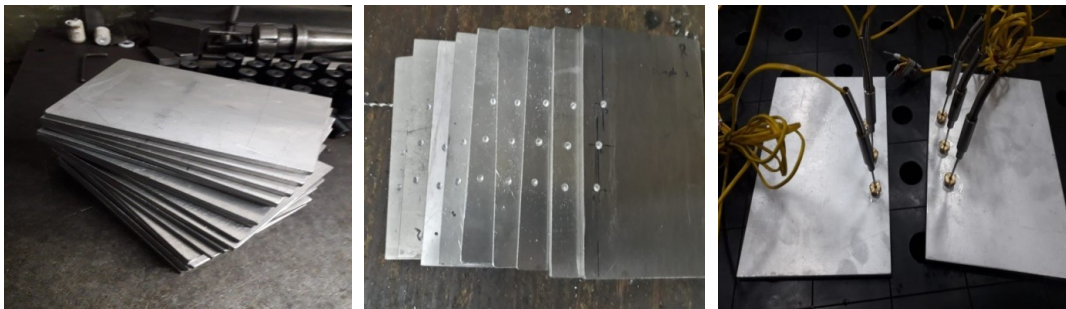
Prepared samples showing Thermocouple locations and fixing to the Samples
